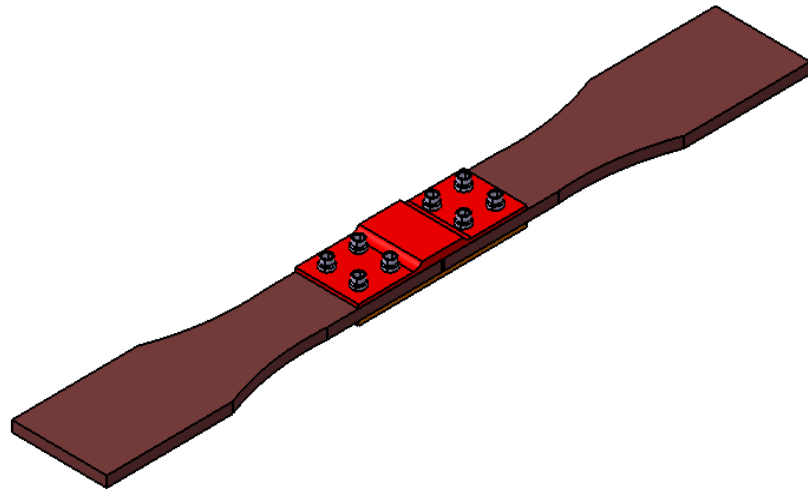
8 Fastener Double Shear Bolt in Radius - Assembly - Isometric View
